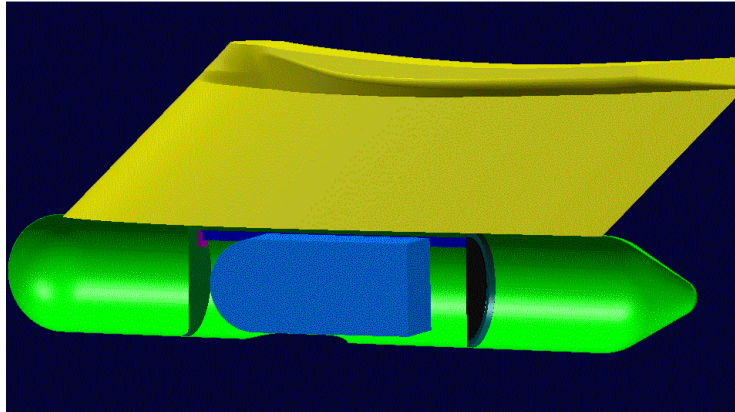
Wing Installation, Pod and Pylon Mounted SFMR Cutaway View
